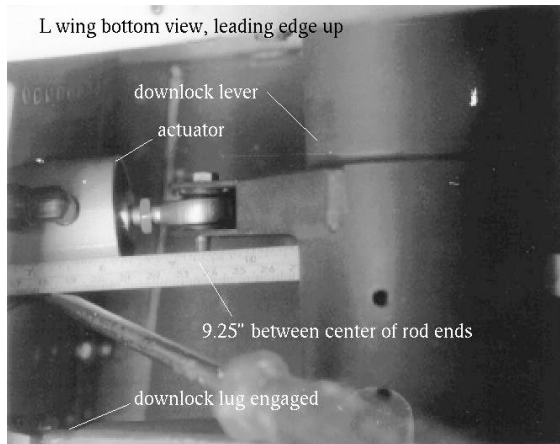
Make sure you keep the actuator length at 9.25" when locating the torque tube.
